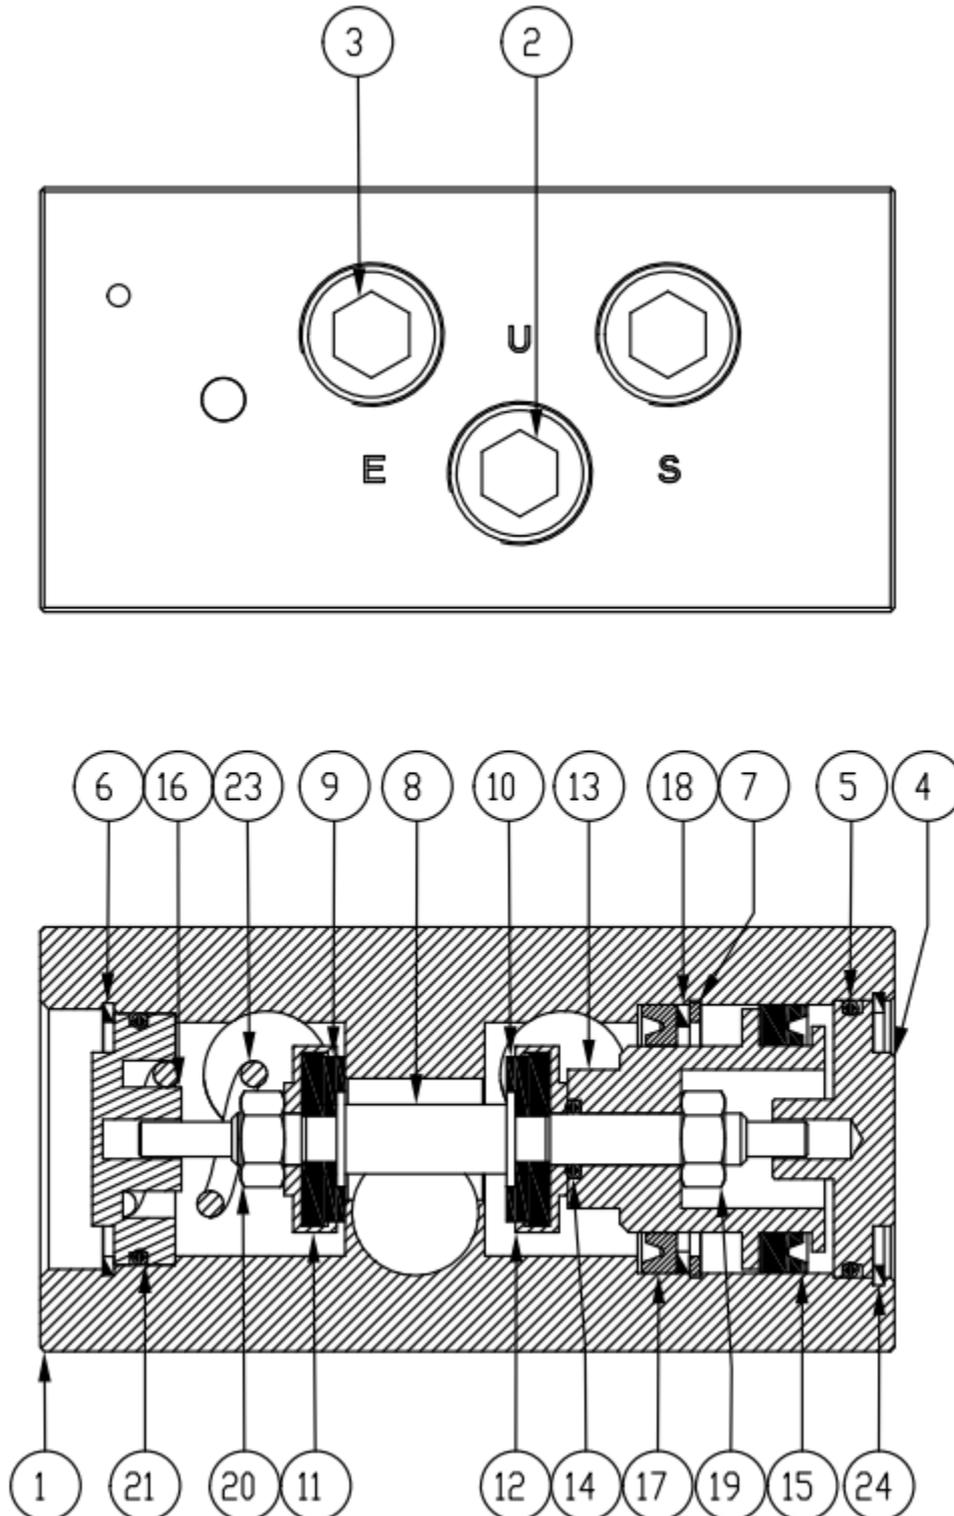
CO 3 way pneumatic valve size 1/2": aluminum machining or stainless steel machining
